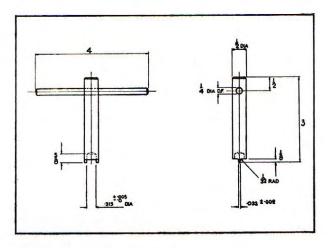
Tool for adjusting air gap setting. (Measurements in inches)
